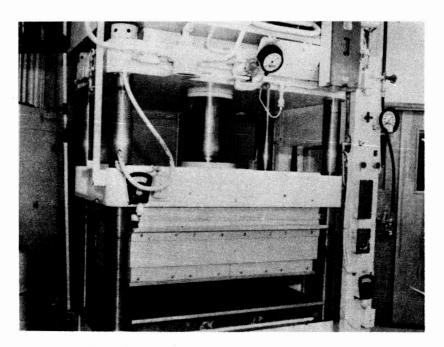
Enlarged Press Assembly (36 in. x 48 in.)
